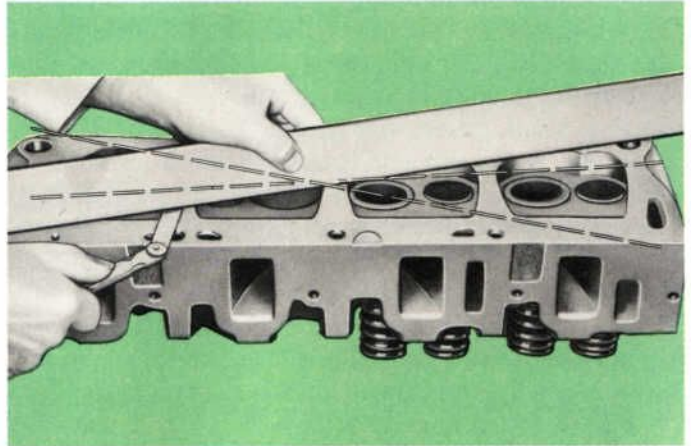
CHECKING CYLINDER HEAD TRUENESS
